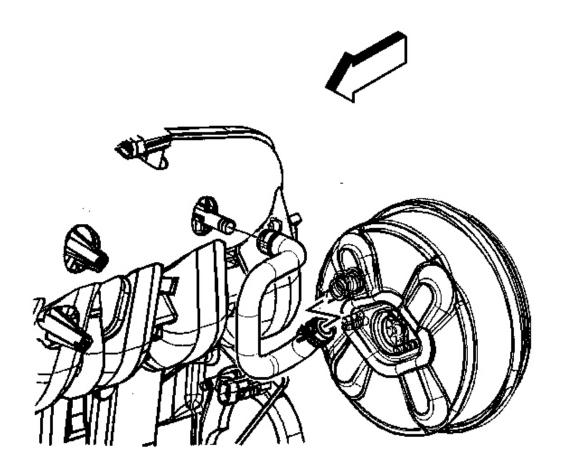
Vacuum Hose From Vacuum Booster And Engine Courtesy of GENERAL MOTORS CORP.
